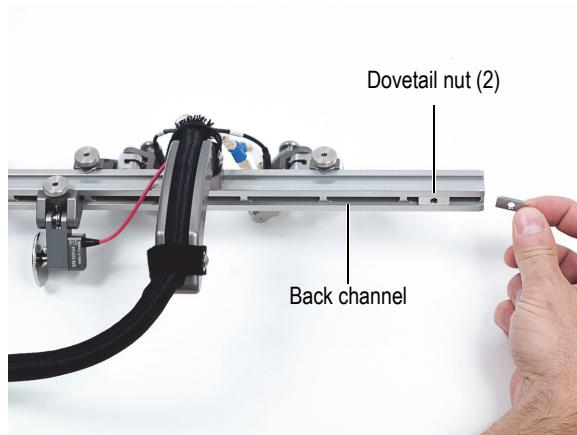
Inserting dovetail nuts in the frame bar back channel
